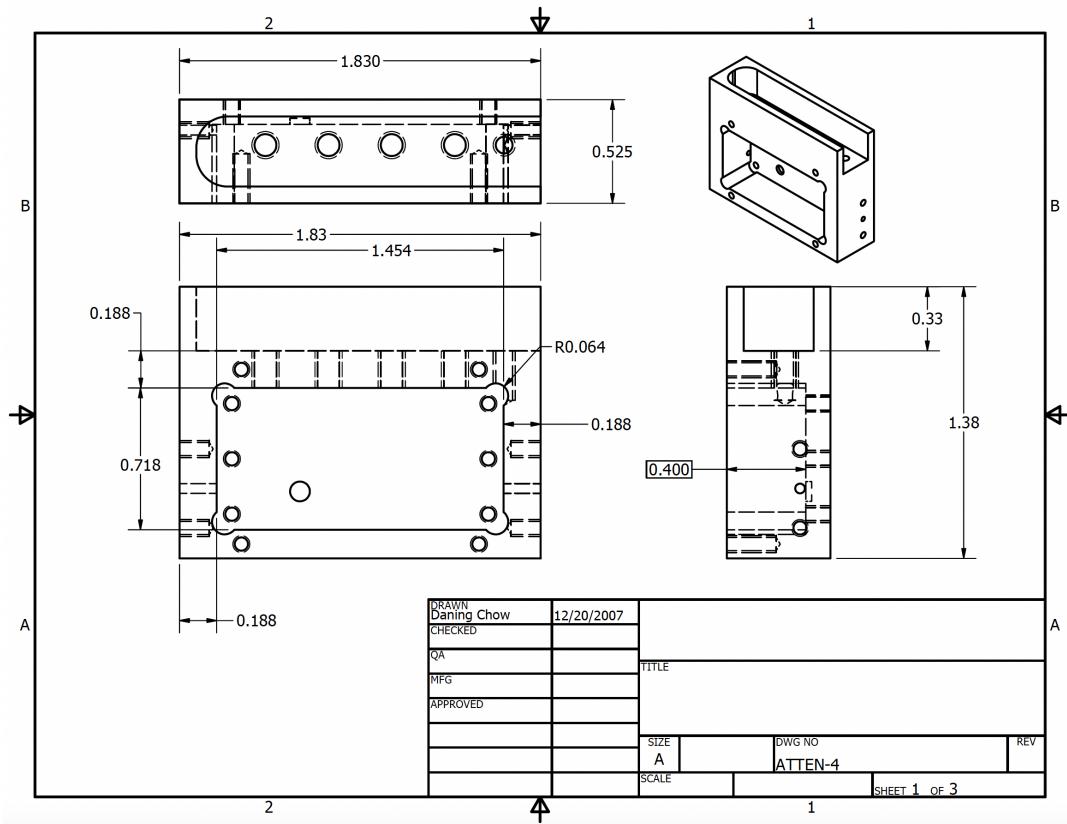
1050-A Attemplifier Enclosure Drawing 1
